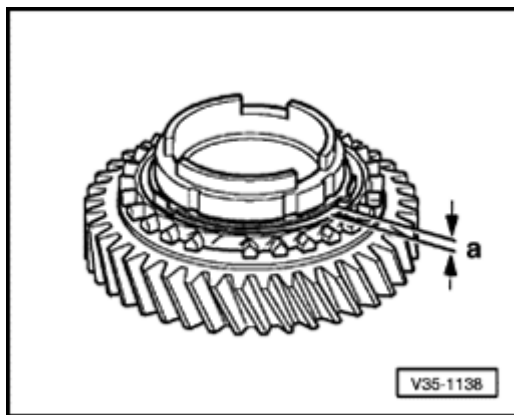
Checking 1st, 2nd and 3rd gear inner ring for wear
